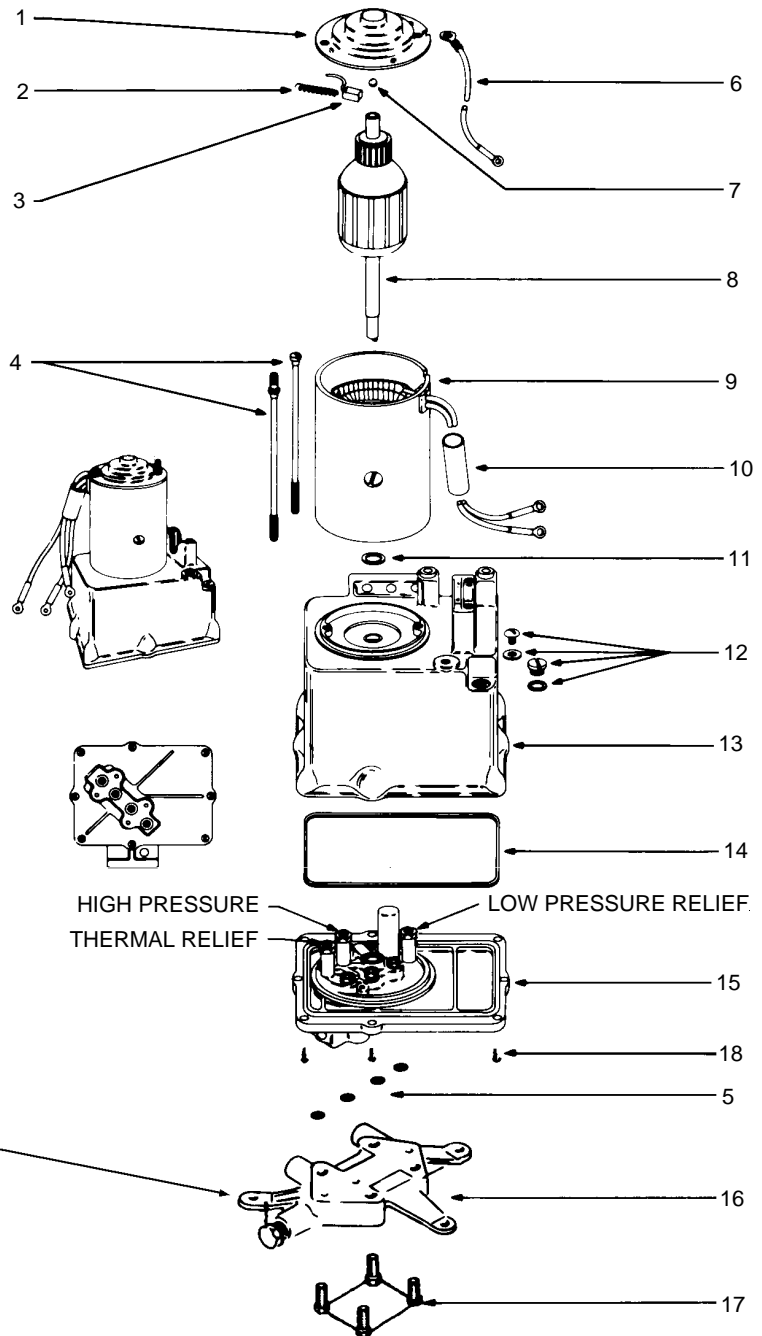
Hydraulic Pump/Reservoir, Exploded View (Prestolite)
